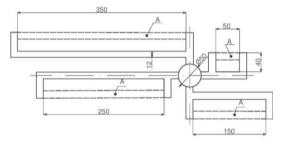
Standardized mold for the Althoff-Radtke test [21]
